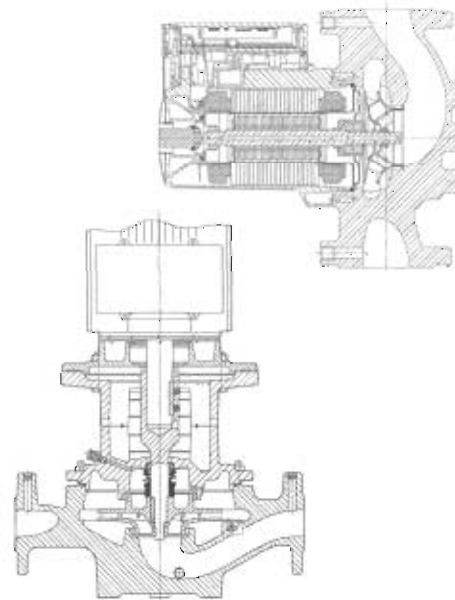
Central heating circulator pumps with inline connections. The upper illustration is the "wet" type. The lower illustration is the conventional dry motor
